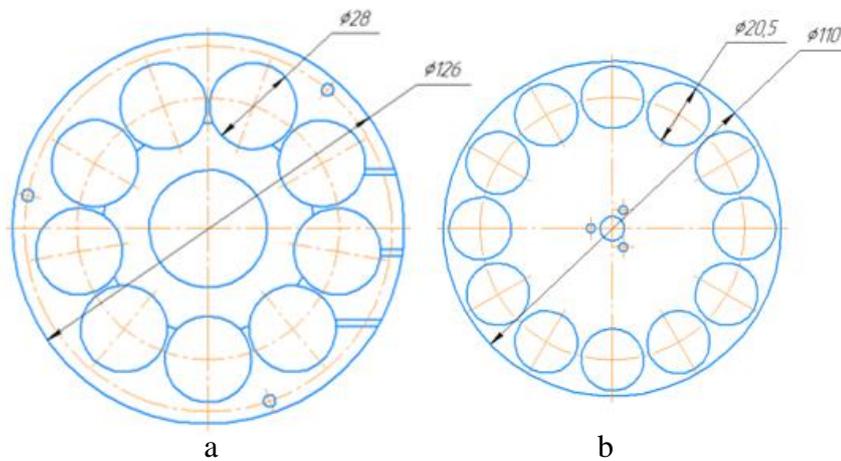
Radial dimensions for generator: a) – stator; b) - rotor
